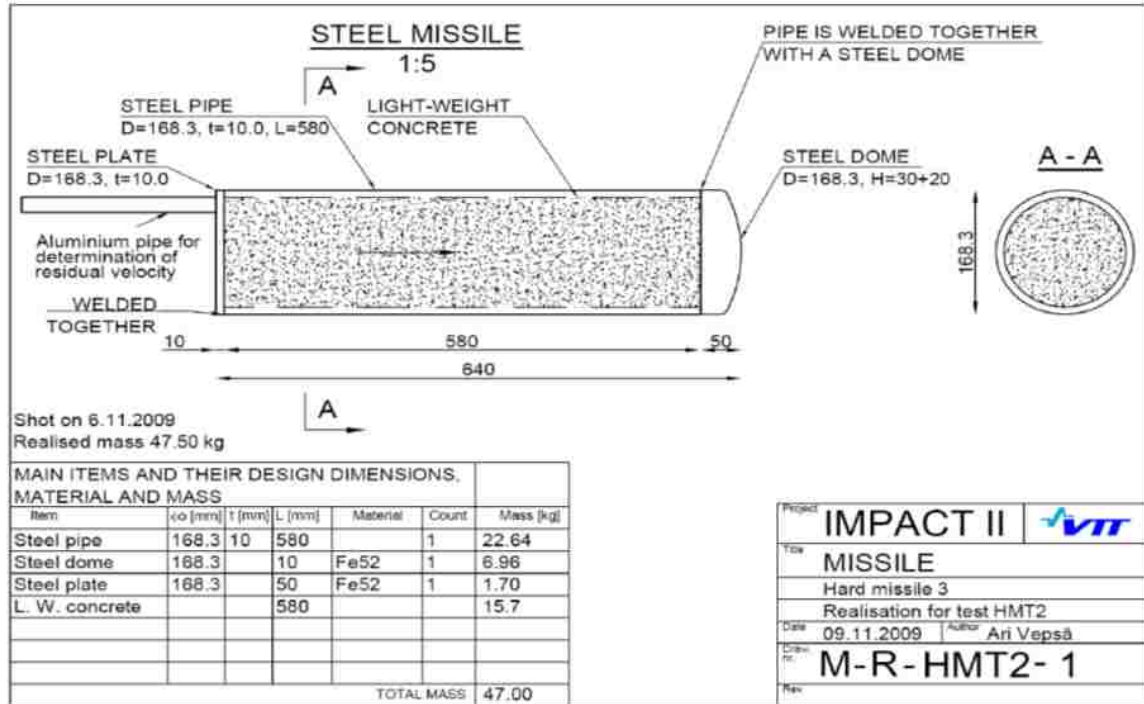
IRSN VTT Punching solid missile engineering drawing
